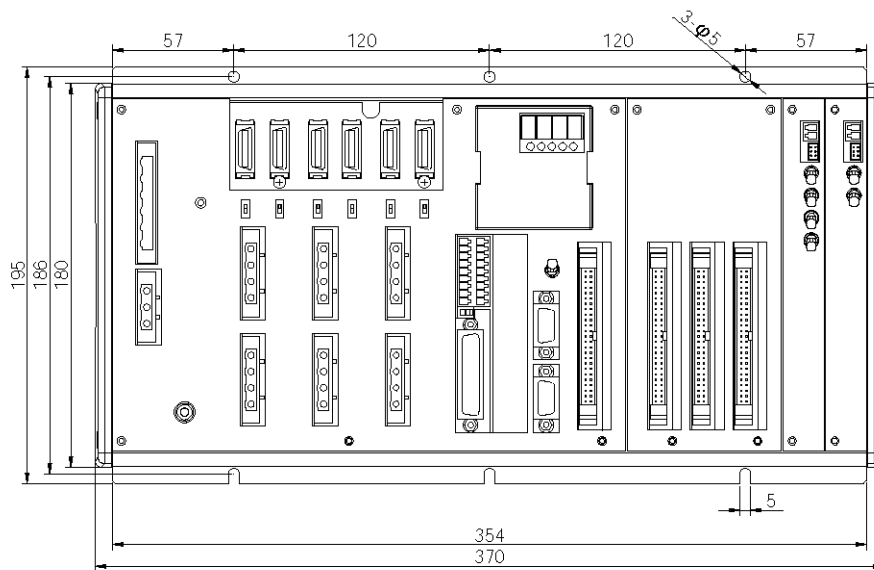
Q Type 6 axis Controller with Expansion I / O Board + Absolute Brake Unit
